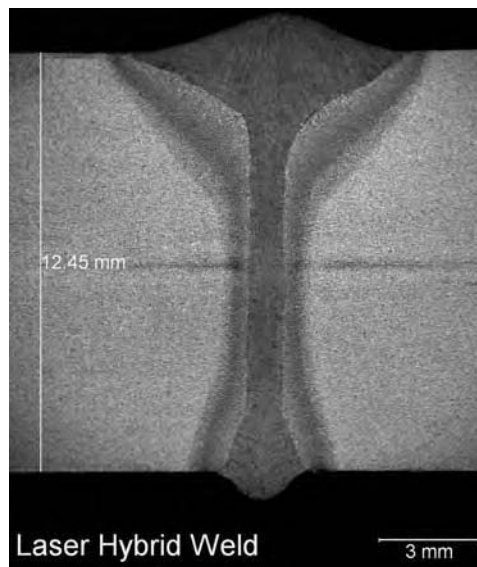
Hybrid laser gas metal arc welding cross section. Courtesy of Edison Welding Institute
